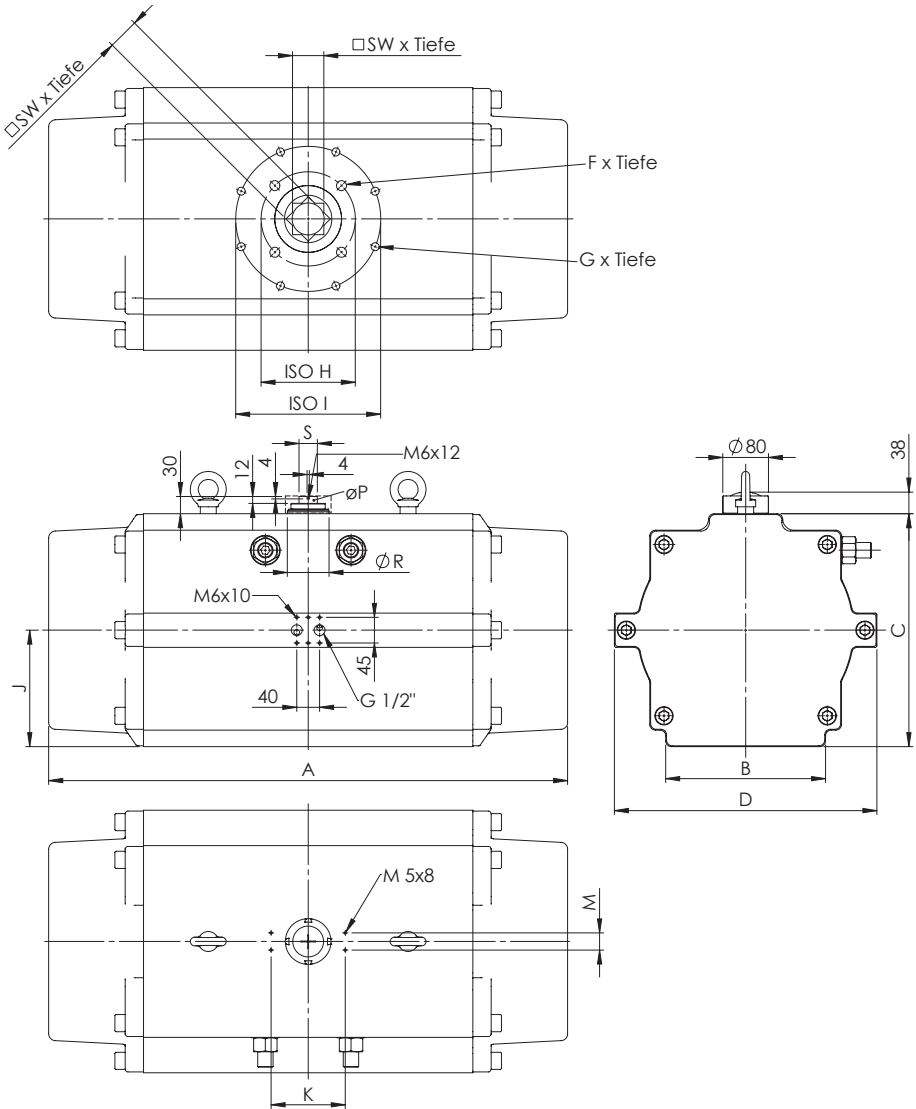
Dimensional drawings for type GDA/GSR-300 till 400
